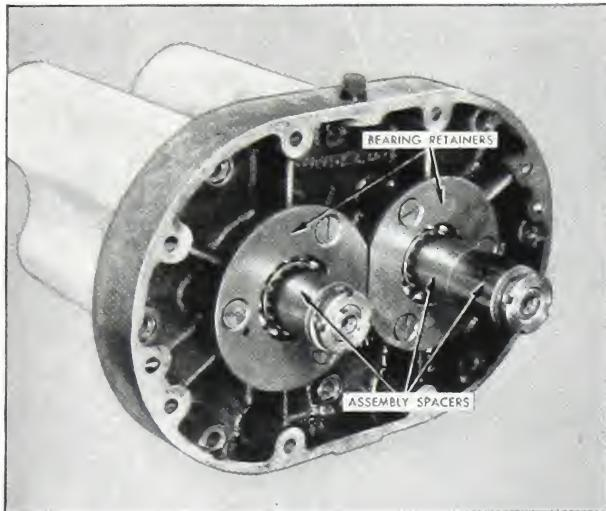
Bearing Retainers and Temporary Assembly Spacers
